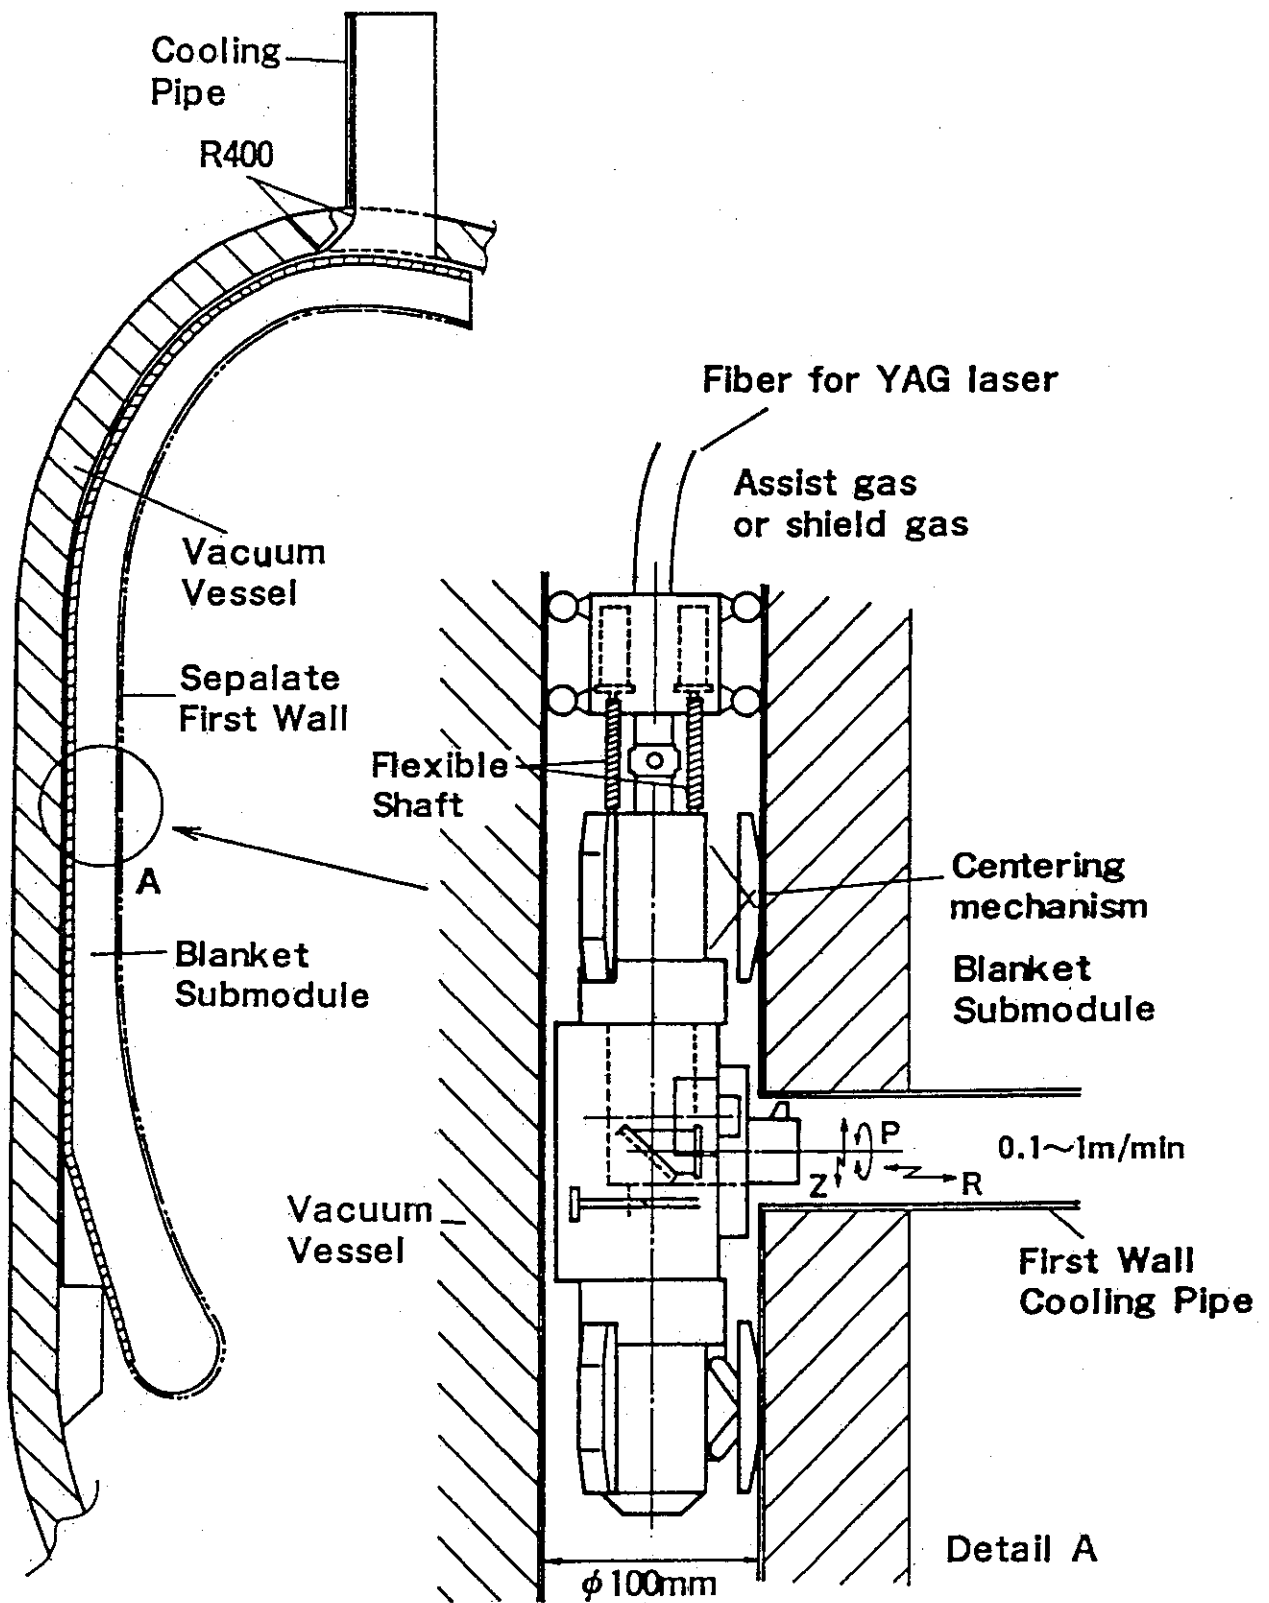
Concept of processing head of YAG laser internal-access pipe cutting/welding equipment.
